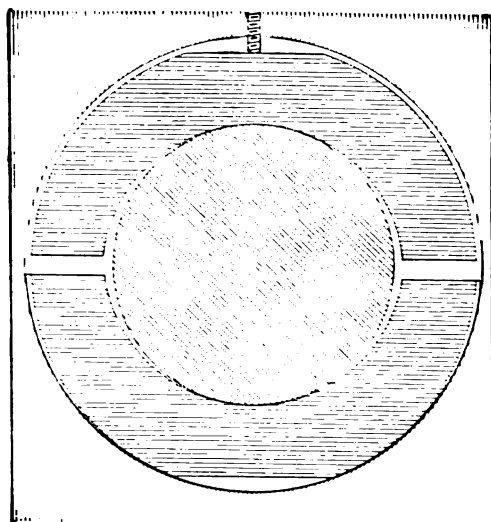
Showing the Contact of a Round Rod held in a Round Hole by means of Bushings.
